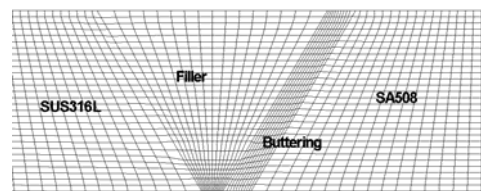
Two-dimensional modeling of the Alloy 182 butt welded plate.
